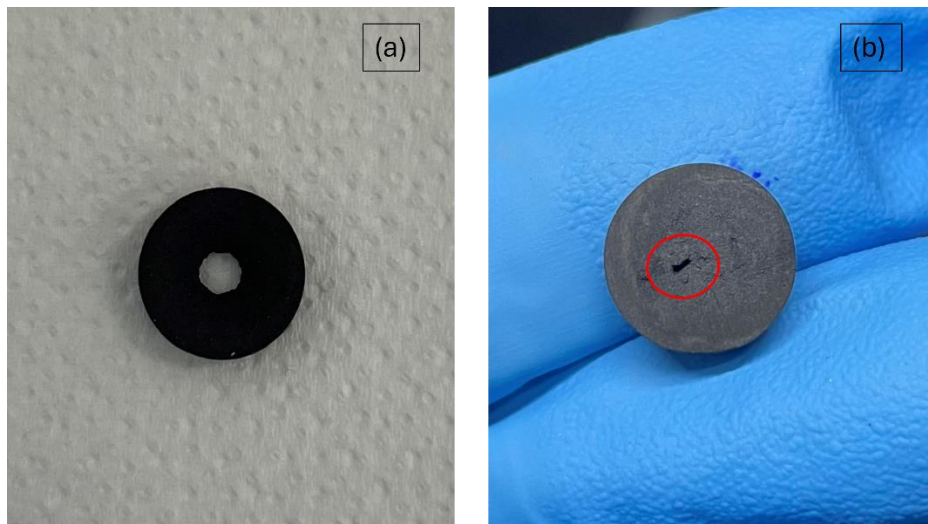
9 Pictures of (a) the drilled target, and (b) the target with a surface hole.
